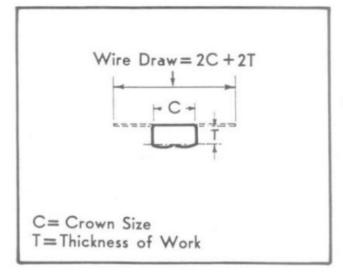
Wire Draw Dimensions and Formula for .175 (4.4mm) thru ½" (12.7mm) Crowns
